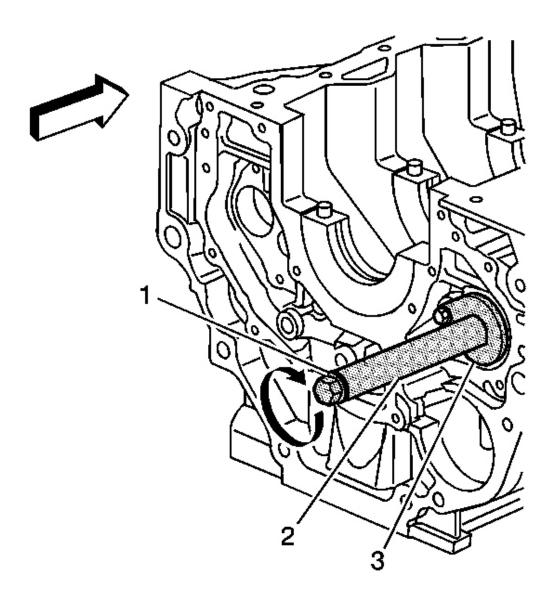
Installing J 44225 - Spacer Between Guide & Washer - Left Courtesy of GENERAL MOTORS CORP.
